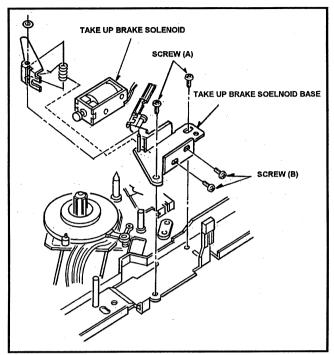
Removal of Take Up Brake Solenoid
